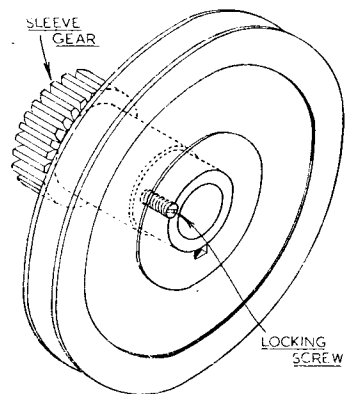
Showing the method of securing the pulley to the sleeved pinion
